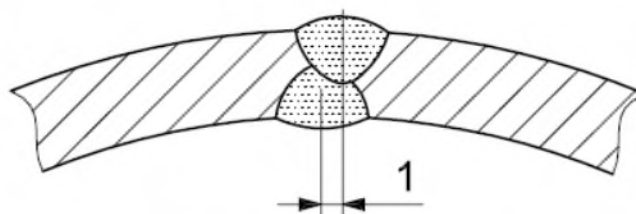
Misalignment of SAW welds [API 5L 2007] [42]
